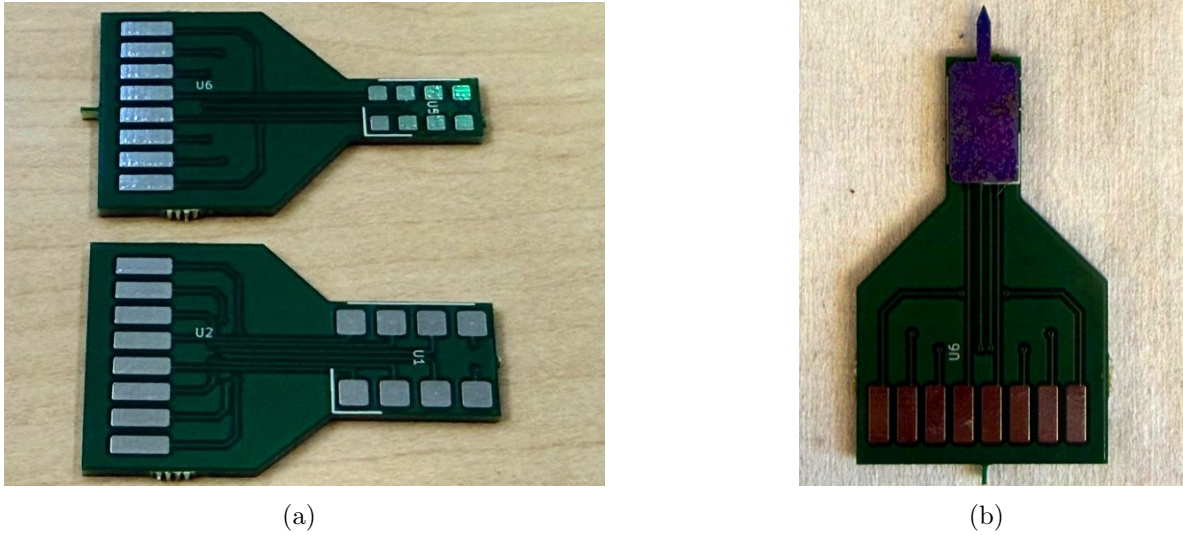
Fabricated PCB interface and assembled MEA-PCB integration. (a) Fabricated custom PCBs corresponding to the two MEA designs. (b) MEA mounted on the PCB.
